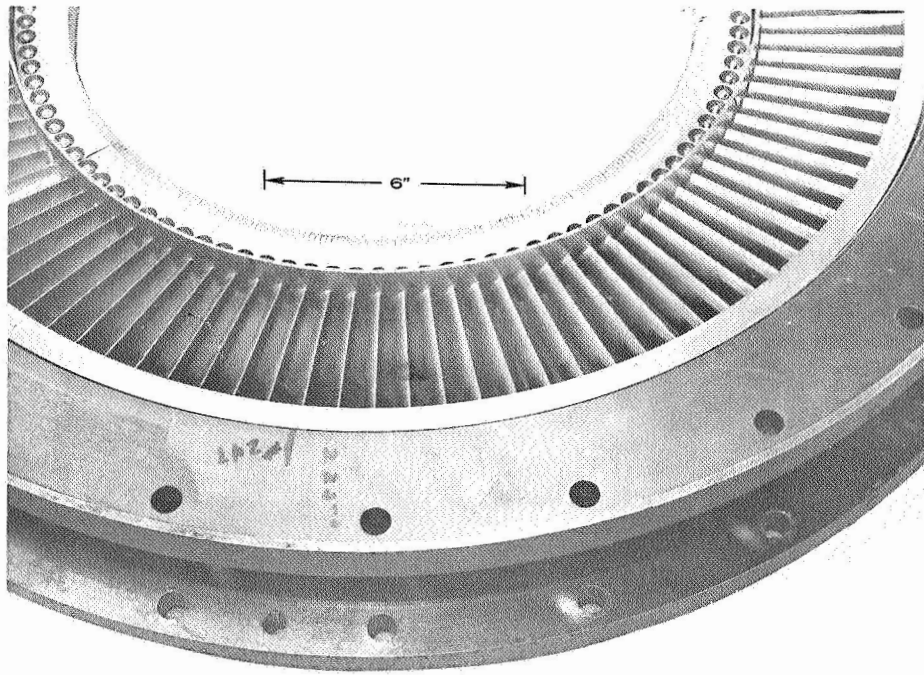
Stage Two Plain Stator Assembled in Outer Casing.
